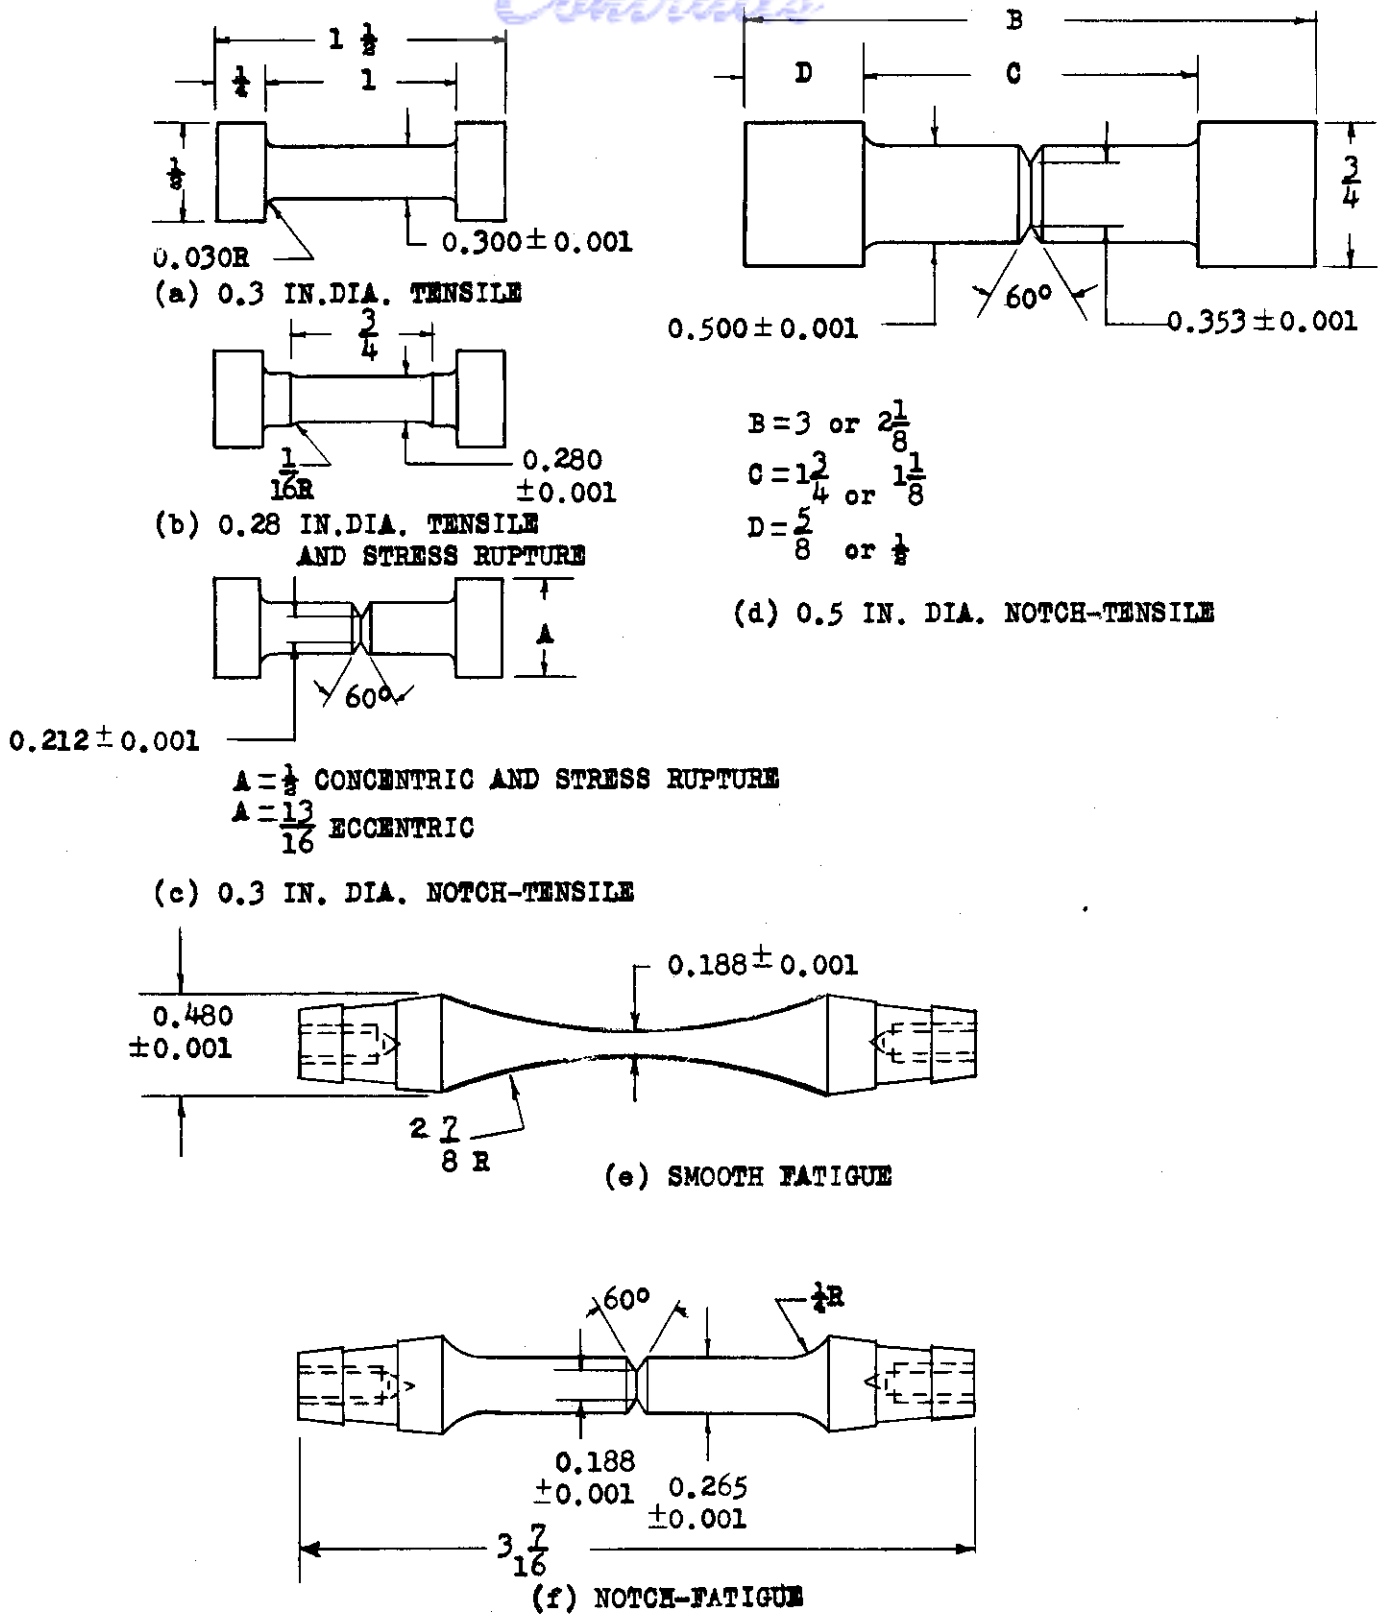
TEST SPECIMENS USED IN THIS INVESTIGATION.
